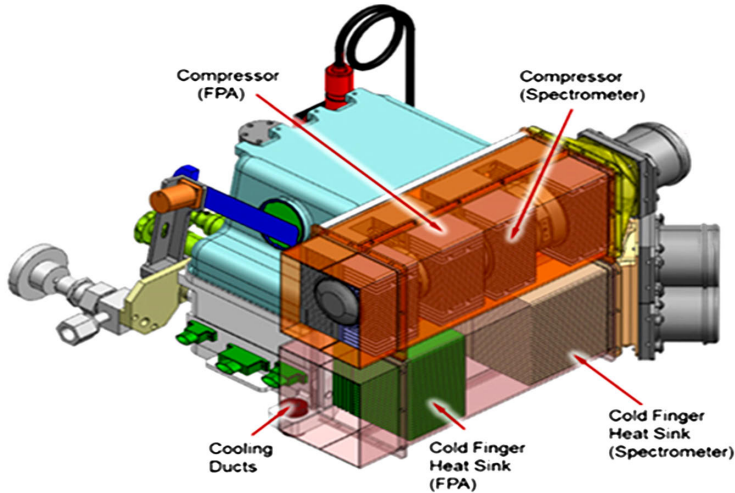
UCIS-A Engineering Model (EM) fully integrated in vacuum enclosure with cryocooler subsystem.
